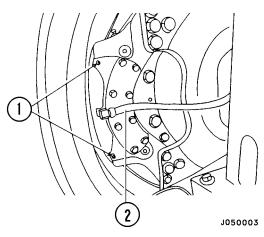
FRONT BRAKE BLEED PLUGS
